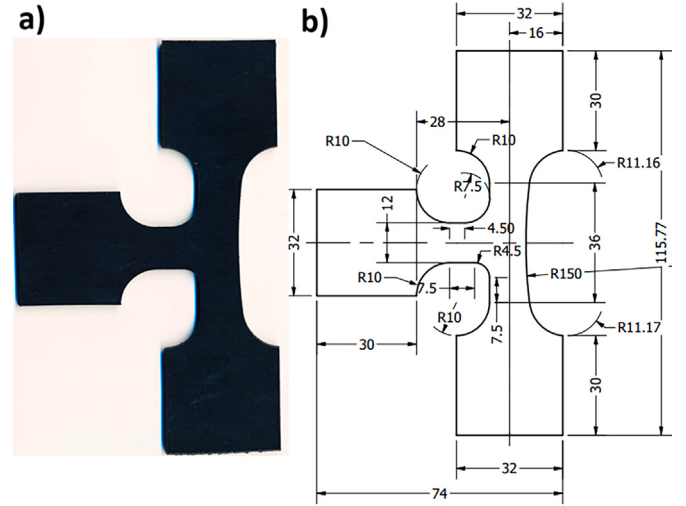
The T-shaped sample (a) and its dimensions in millimeters (b) cut out from the rectangular sheets of 2.3 mm thickness.
